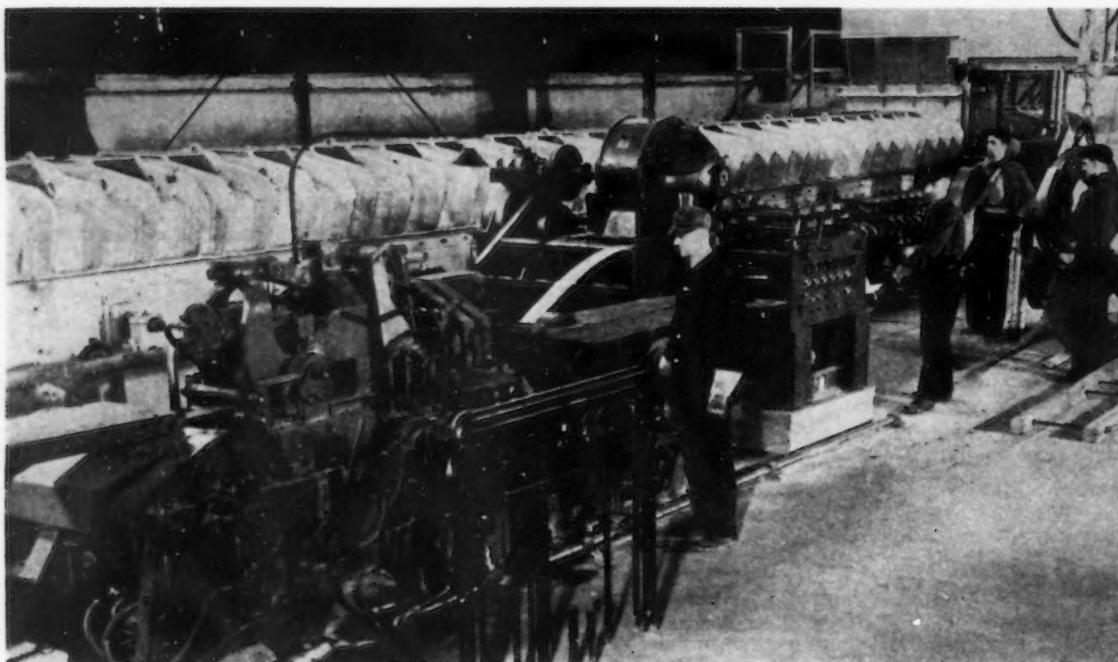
Skelp is fed through a leveler and into the welding machine to join coil ends.
